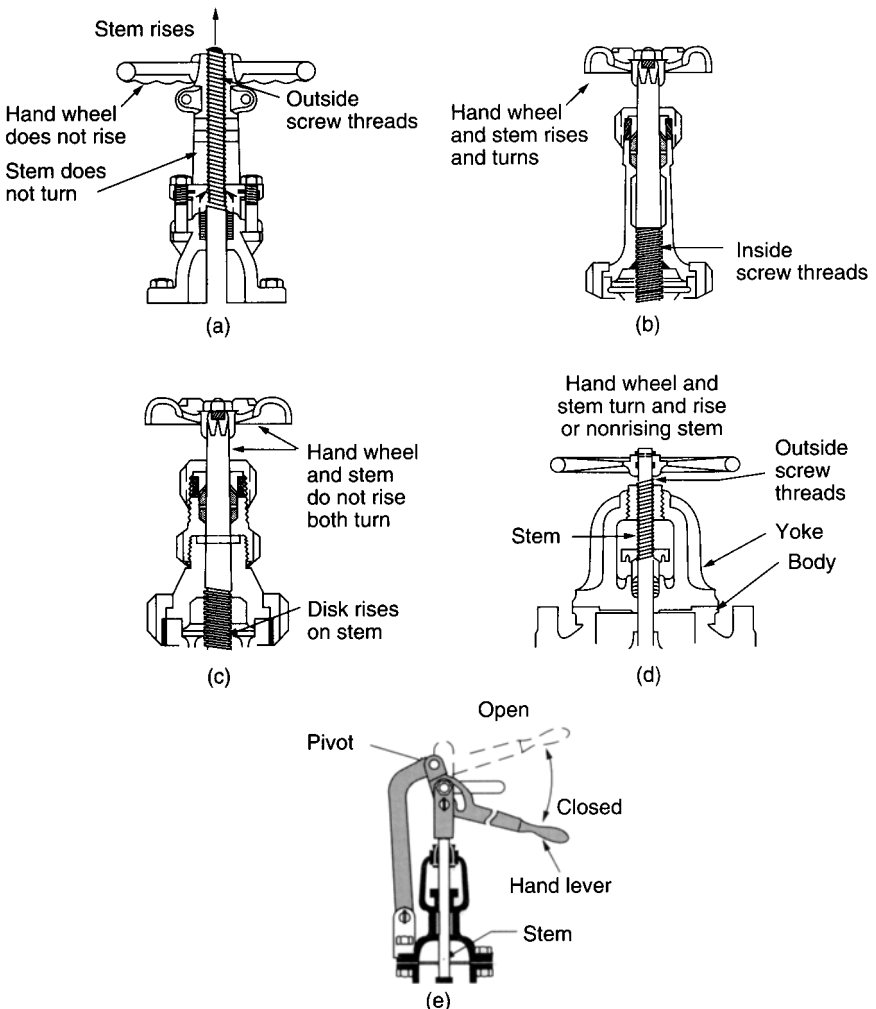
Basic stem construction. (a) Rising stem, outside screw; (b) rising stem, inside screw; (c) nonrising stem, inside screw; (d) rising stem, outside screw and yoke; (e) sliding stem.
